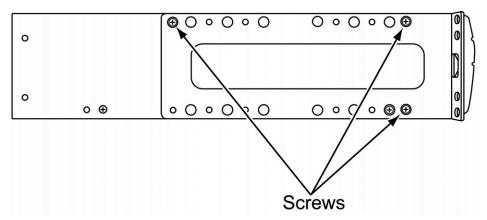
Rack Mount Bracket Installed 19" CHS2U-US
